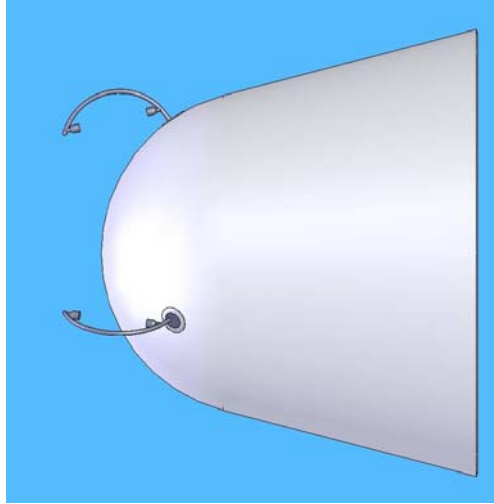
The sonic sensors with classic sensor heads mounted on the S300 spinner.
